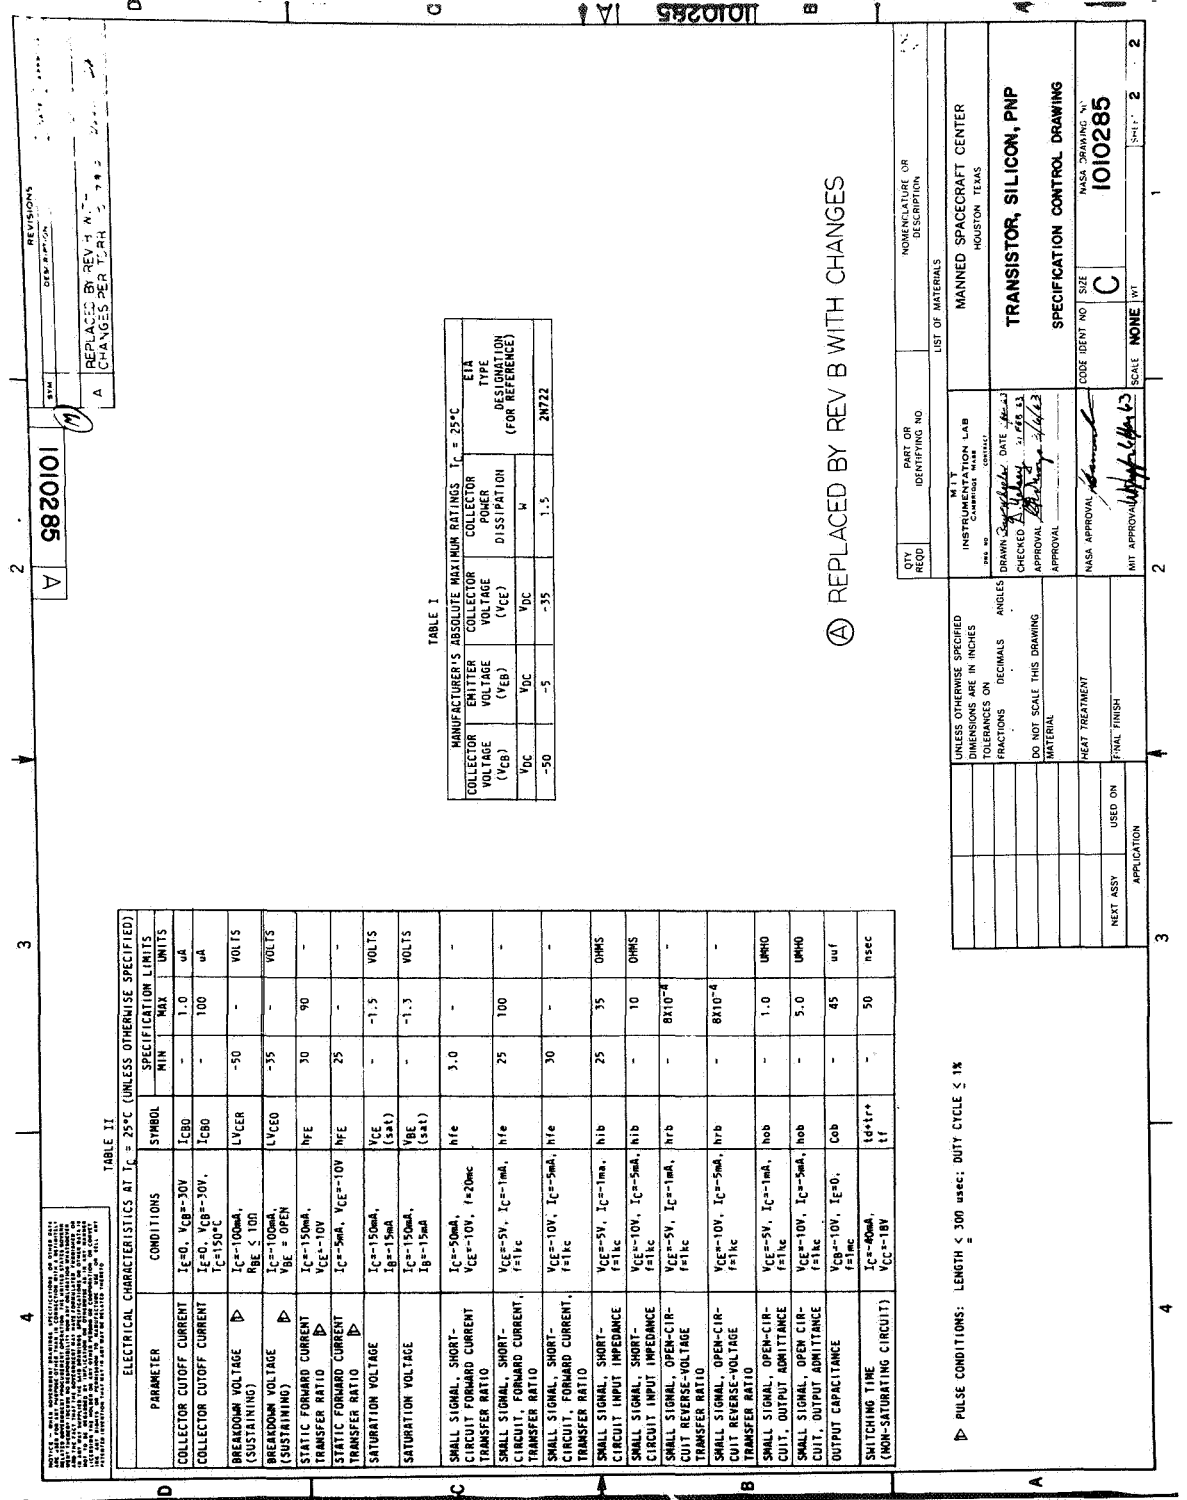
Sample Specification Control Drawing (Sheet 2 of 2).
